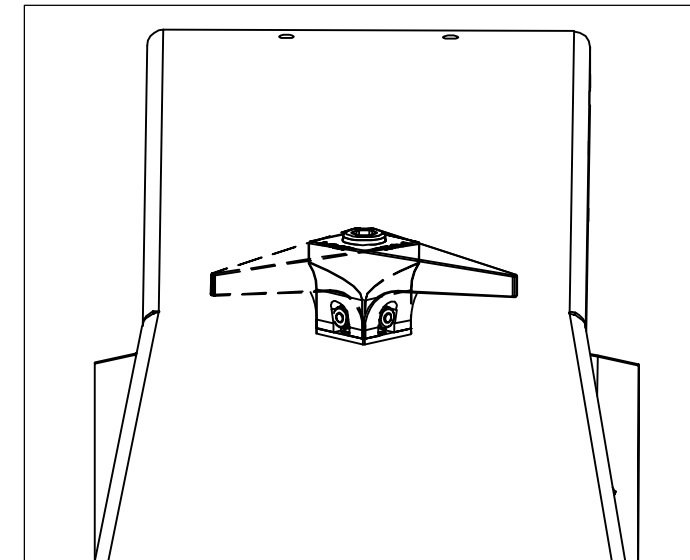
CHECK DETENT FUEL HANDLE MOVEMENT
